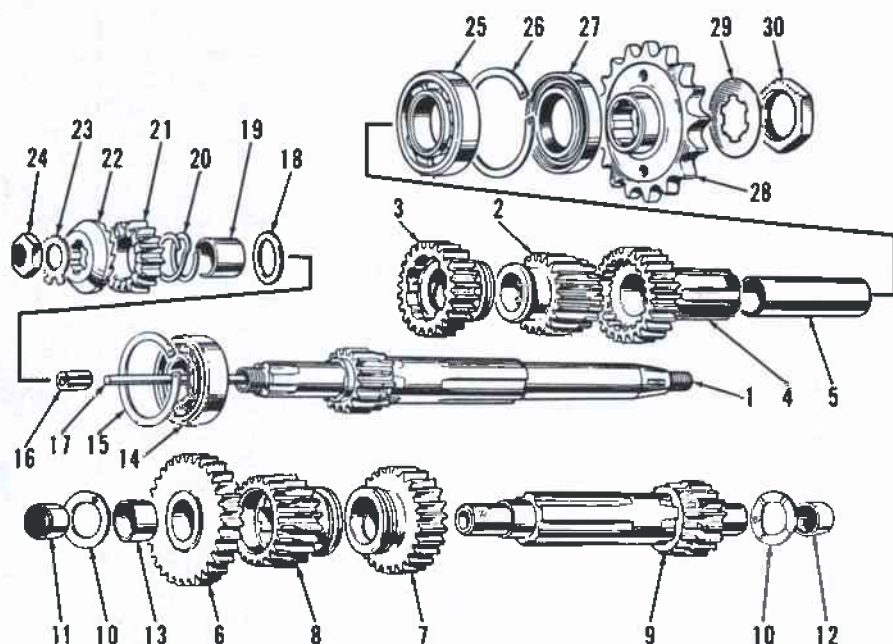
Exploded view of four speed transmission assembly. Refer to Fig. TM4-33 for assembled view.
